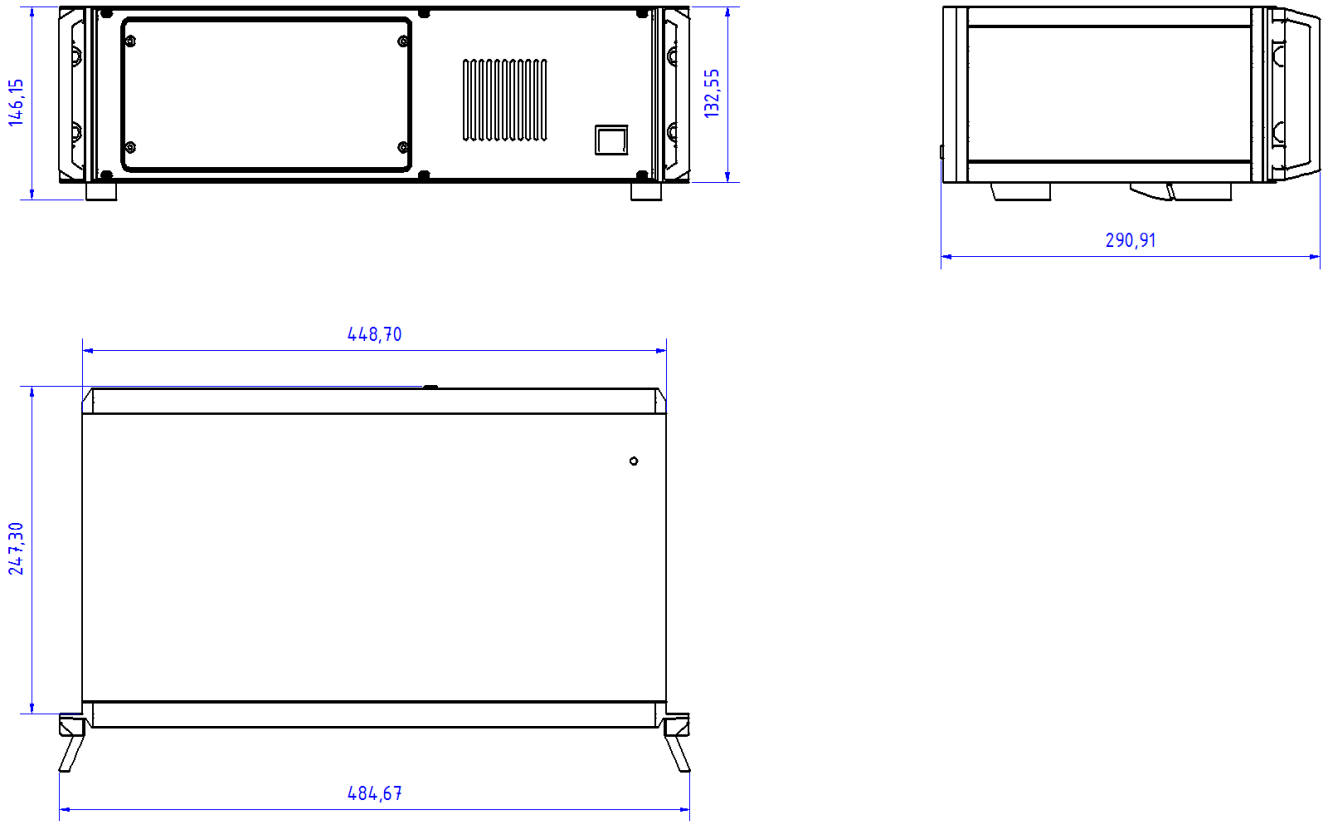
RT-800, mechanical dimensions (tabletop version)
